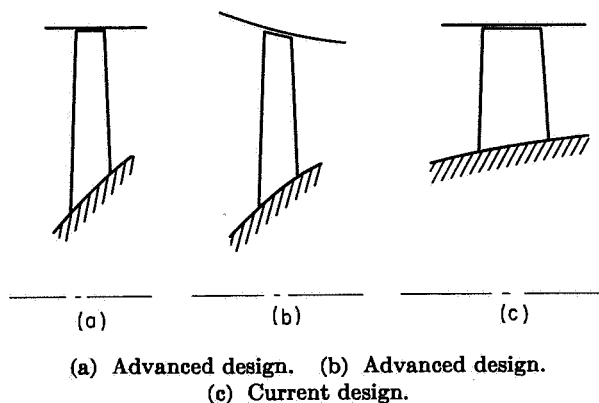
Schematic drawing of several compressor-inlet stages.
